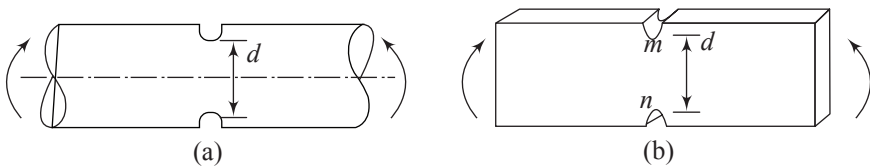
Shaft and plate with hyperbolic grooves under bending
